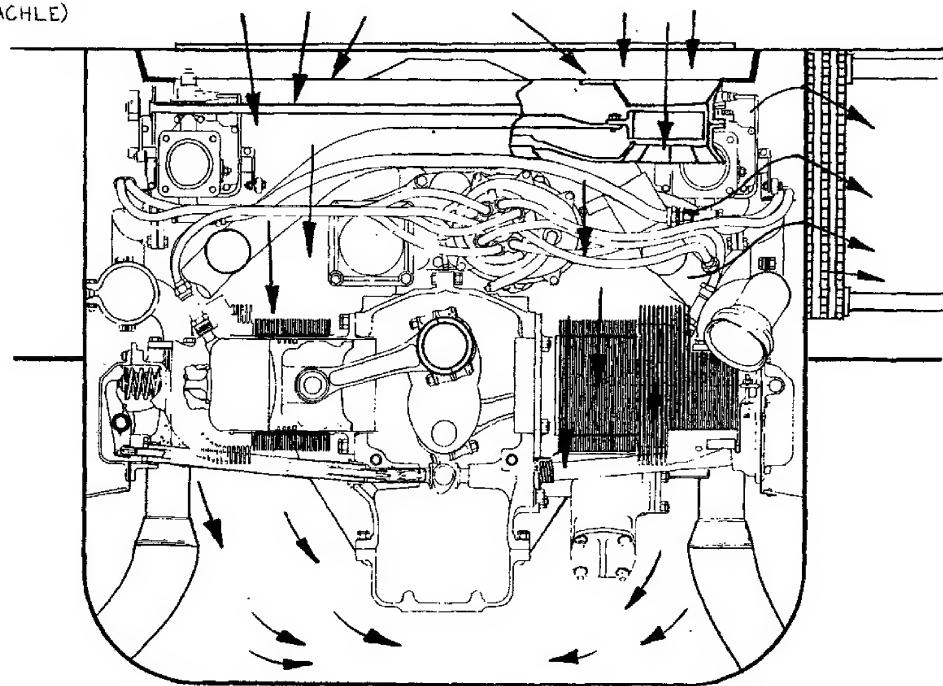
TOP VIEW OF ENGINE COMPARTMENT OF MILITARY VEHICLE SHOWING INSTALLATION OF AO-536 ENGINE.
